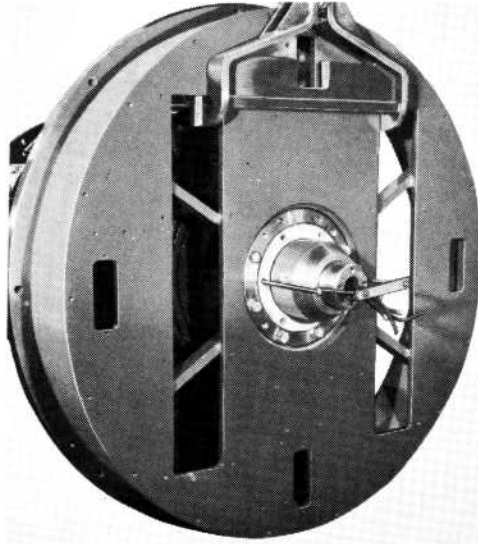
Applying End Housing To Rotor Assembly 15274
